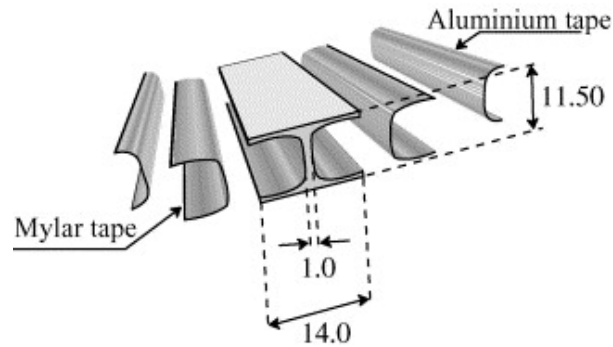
Exploded view an I-beam with insulators and cathode strips.
